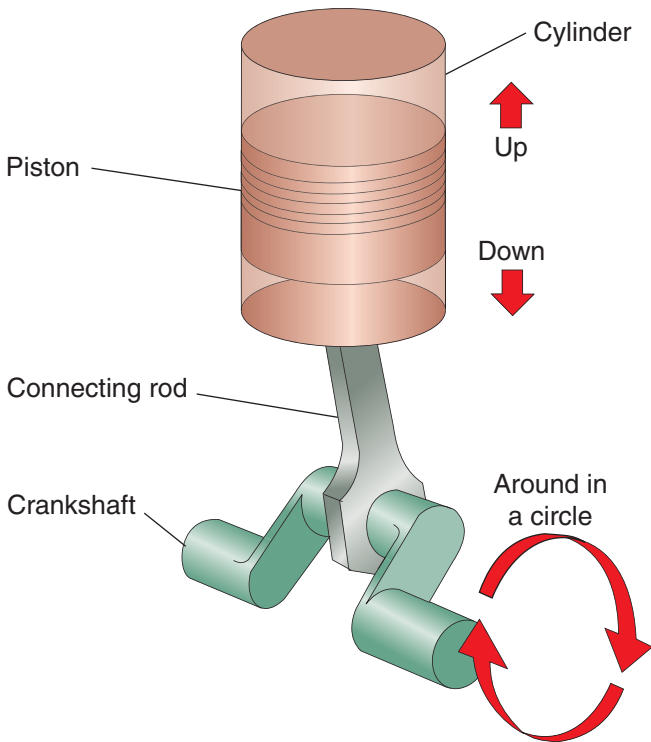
The connecting rod connects the piston to the crankshaft. The reciprocating (up-and-down) motion of the piston is changed to rotary (circular) motion at the crankshaft.
